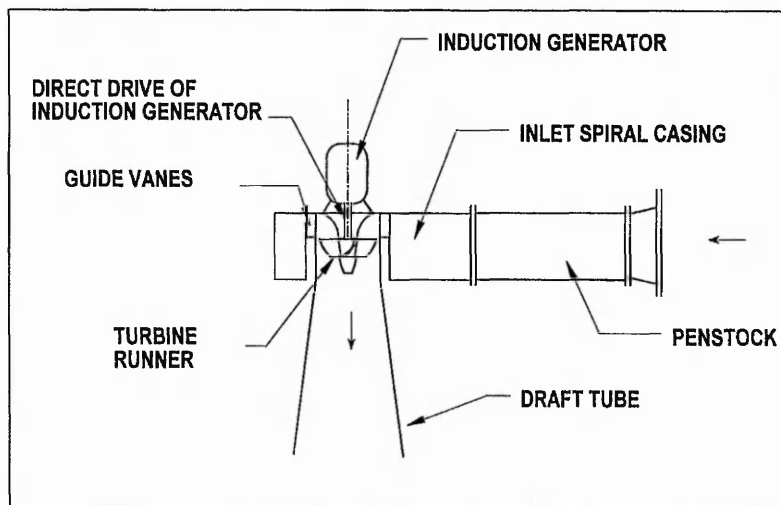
Propeller Turbine / Induction Generator Unit Assembly
